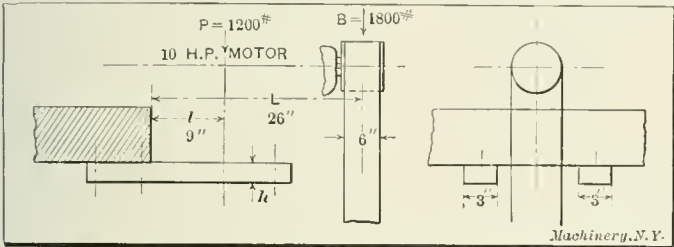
Motor Support made of Machine-steel Bars, as Belt Pull is downward
